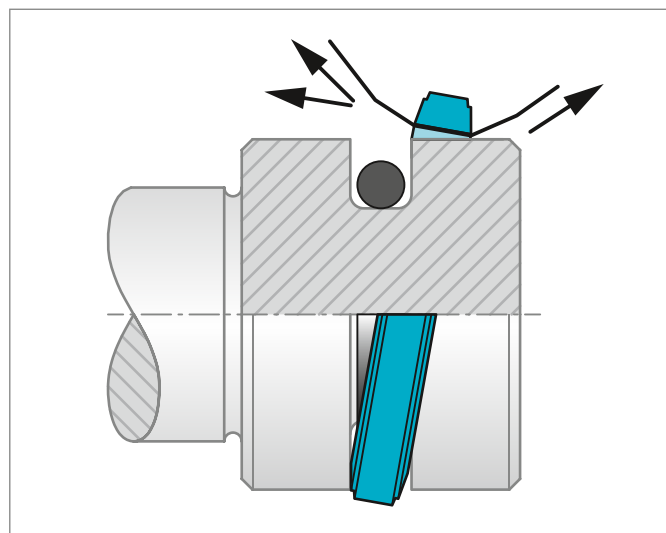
Fitting the seal ring onto the O-Ring in the groove
